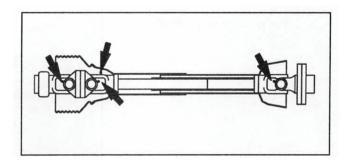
PTO SHAFT (HORIZONTAL SHAFT)
